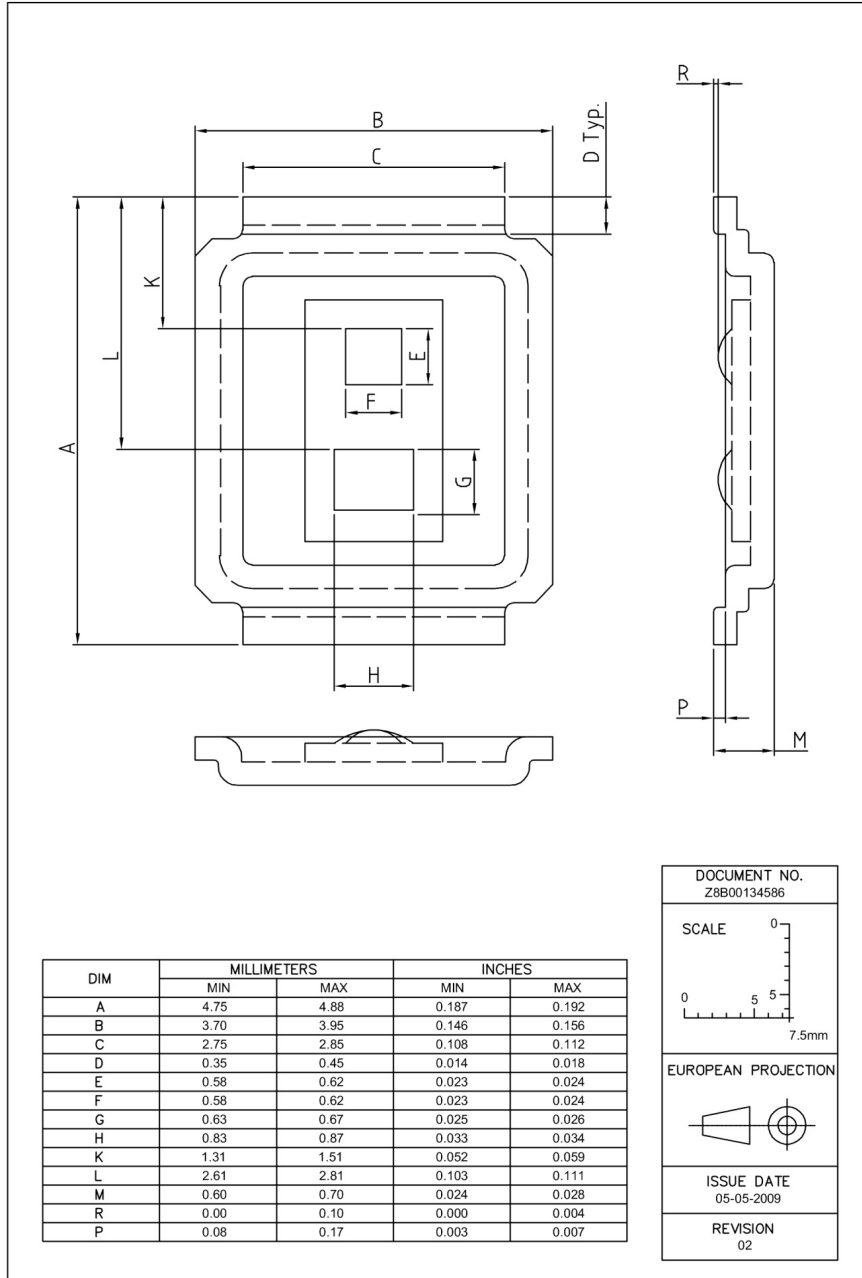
Outline MG-WDSO-2, dimensions in mm/inches
